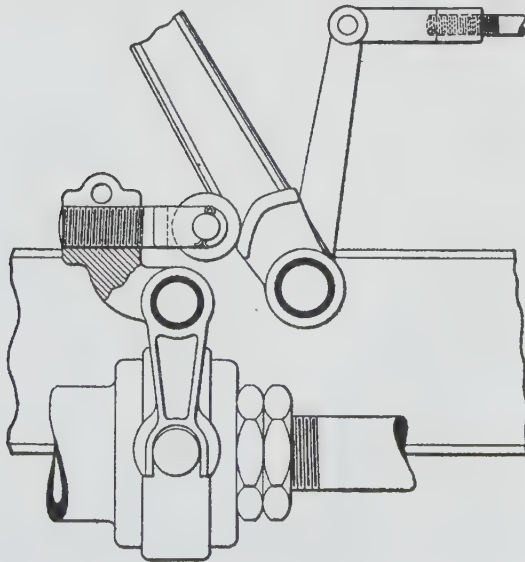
SINGLE PEDAL CONTROL, CAM TYPE.
